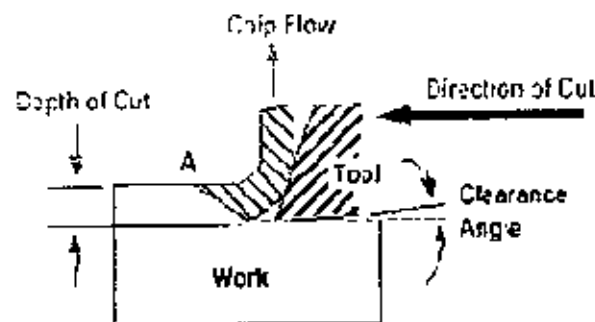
Machining Process [Boothroyd and Knight 1989]
